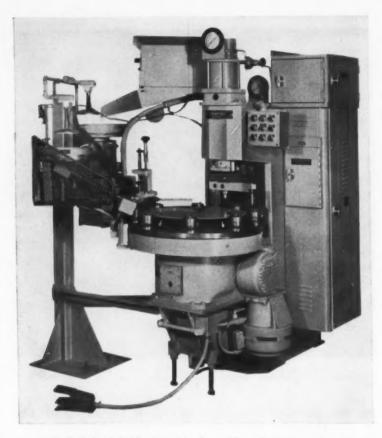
Federal dial-feed machine for welding of power transistors
